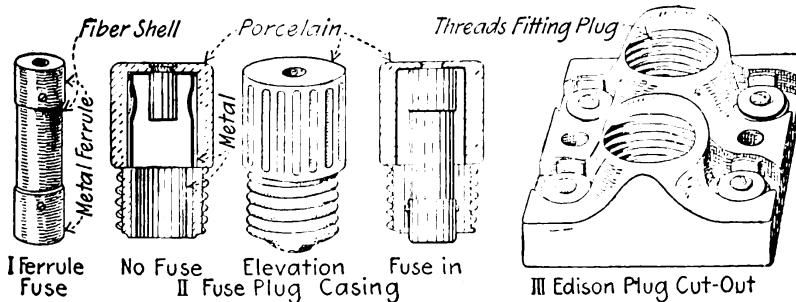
Edison plug cut-out and Edison fuse plug casing.
